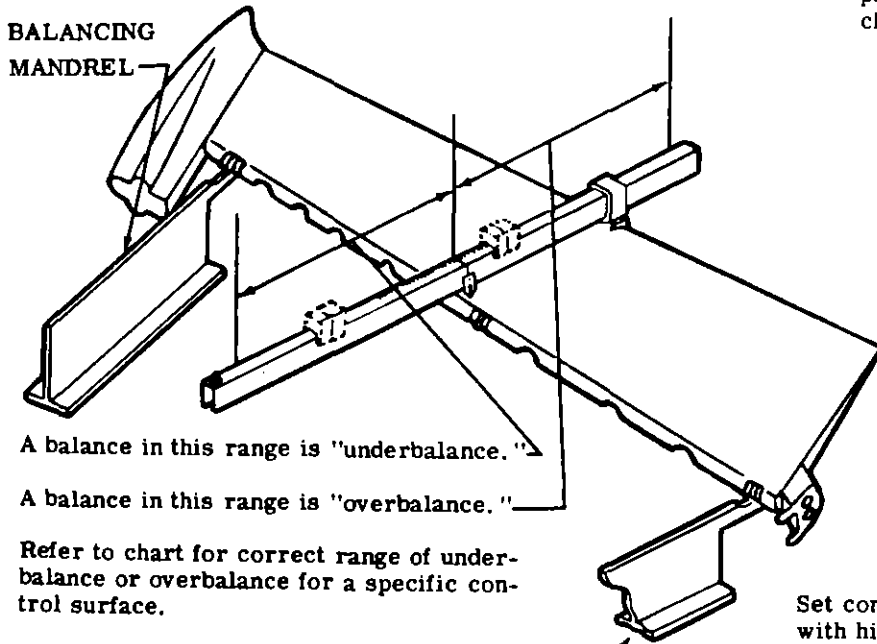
Control Surface Balancing (Sheet 1 of 3)
